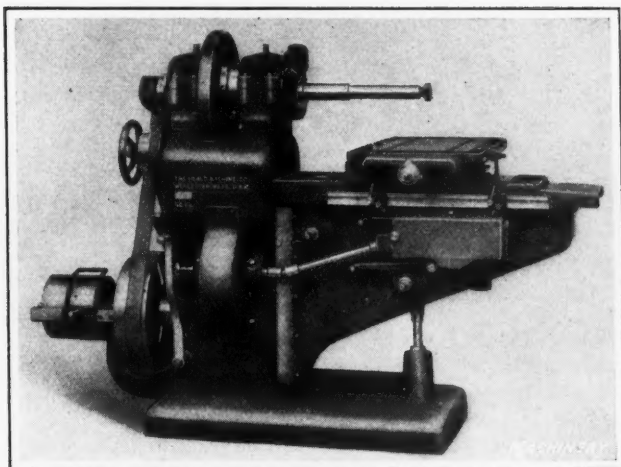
Front View of No. 55 Cylinder Grinding Machine built by the Heald Machine Co.
